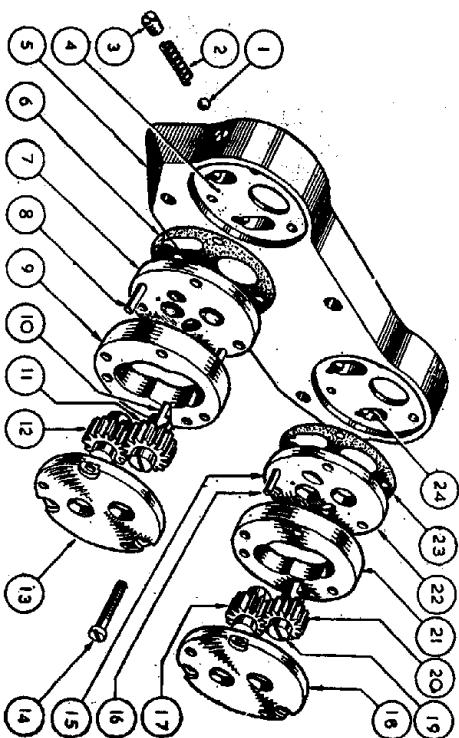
EXPLODED VIEW OF THE OIL PUMPS.
